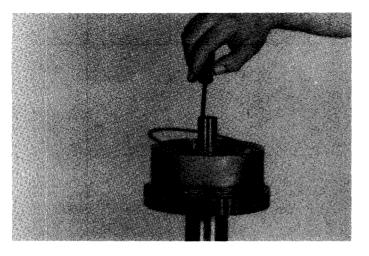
Install end plate retainer ring. See transmission reassembly on page 38.
